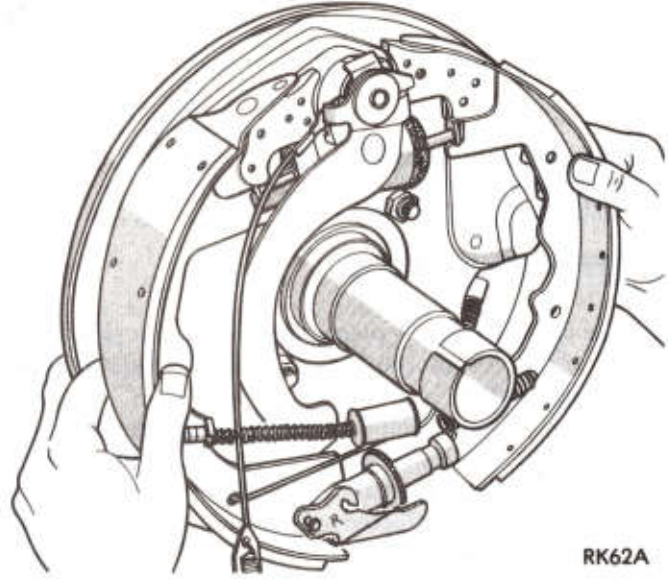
Removing or Installing Shoe Assembly (Rear)
